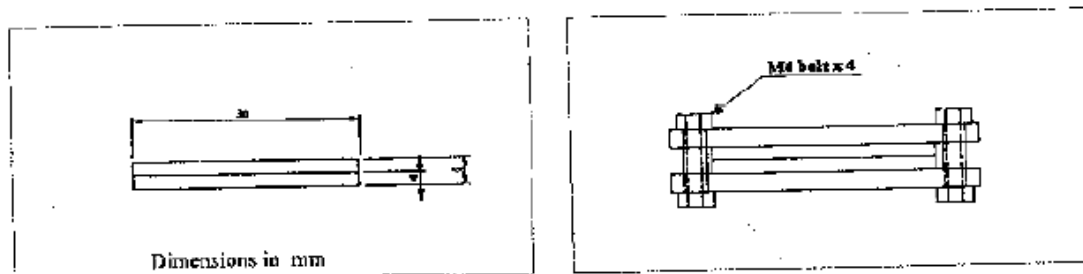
a- The joint design and dimensions of single butt joint b- The fixture of the single butt joint
